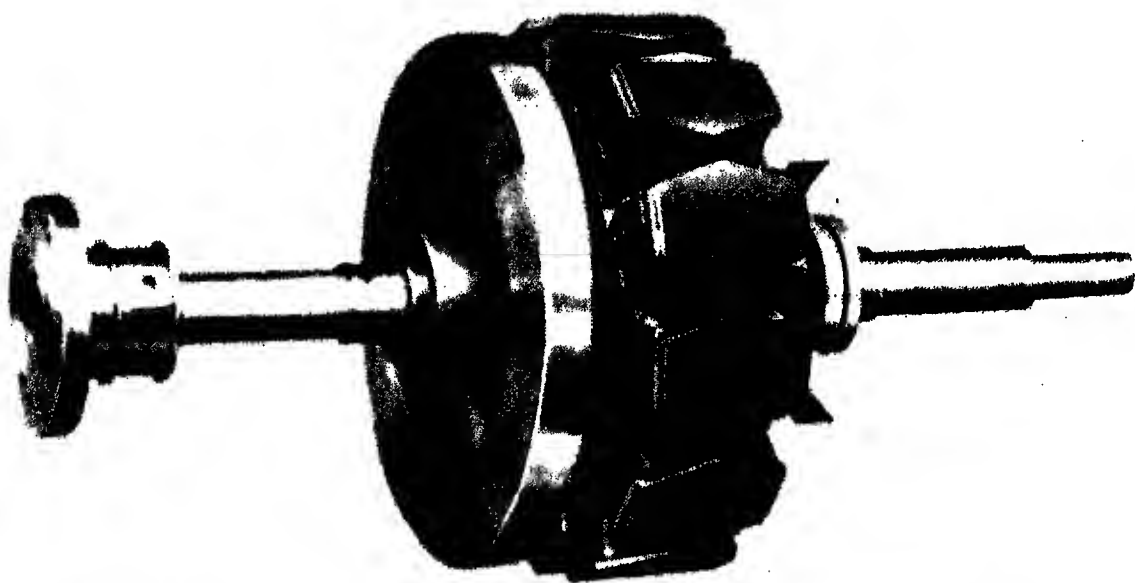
Rotor with flywheel for a three-phase alternator, 305 kVA, 500 r. p. m.
